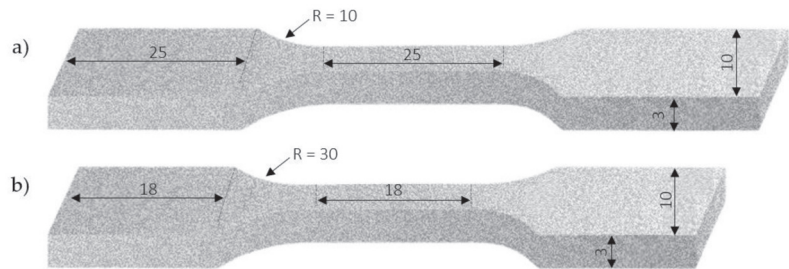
Shape and dimensions (in mm) of (a) tensile and (b) fatigue specimens.
